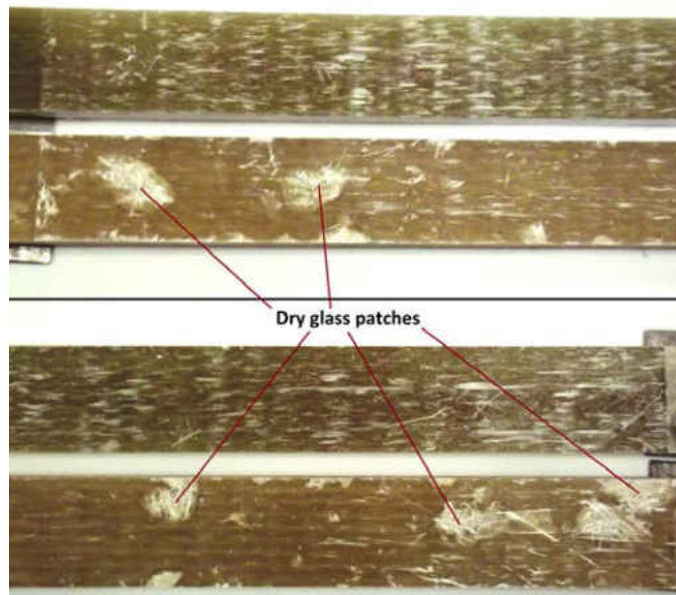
Fractured surfaces of NRR3 specimens with dry patches in CSM
